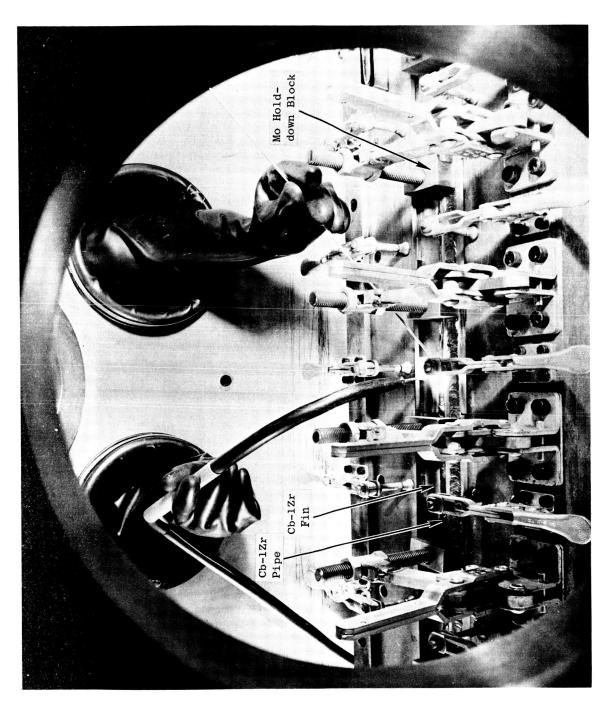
Prototype Corrosion Loop Condenser and Fixture During Welding of Fin to Condenser Pipe. (Orig. C65022602)
